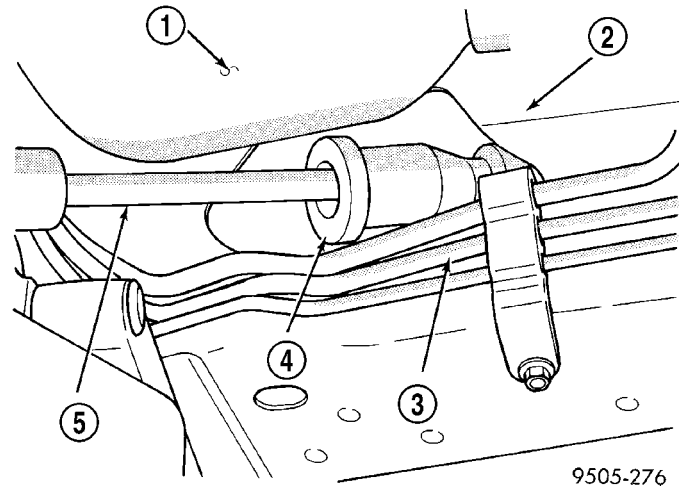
Park Brake Cable Removal/Installation At Floor Pan
